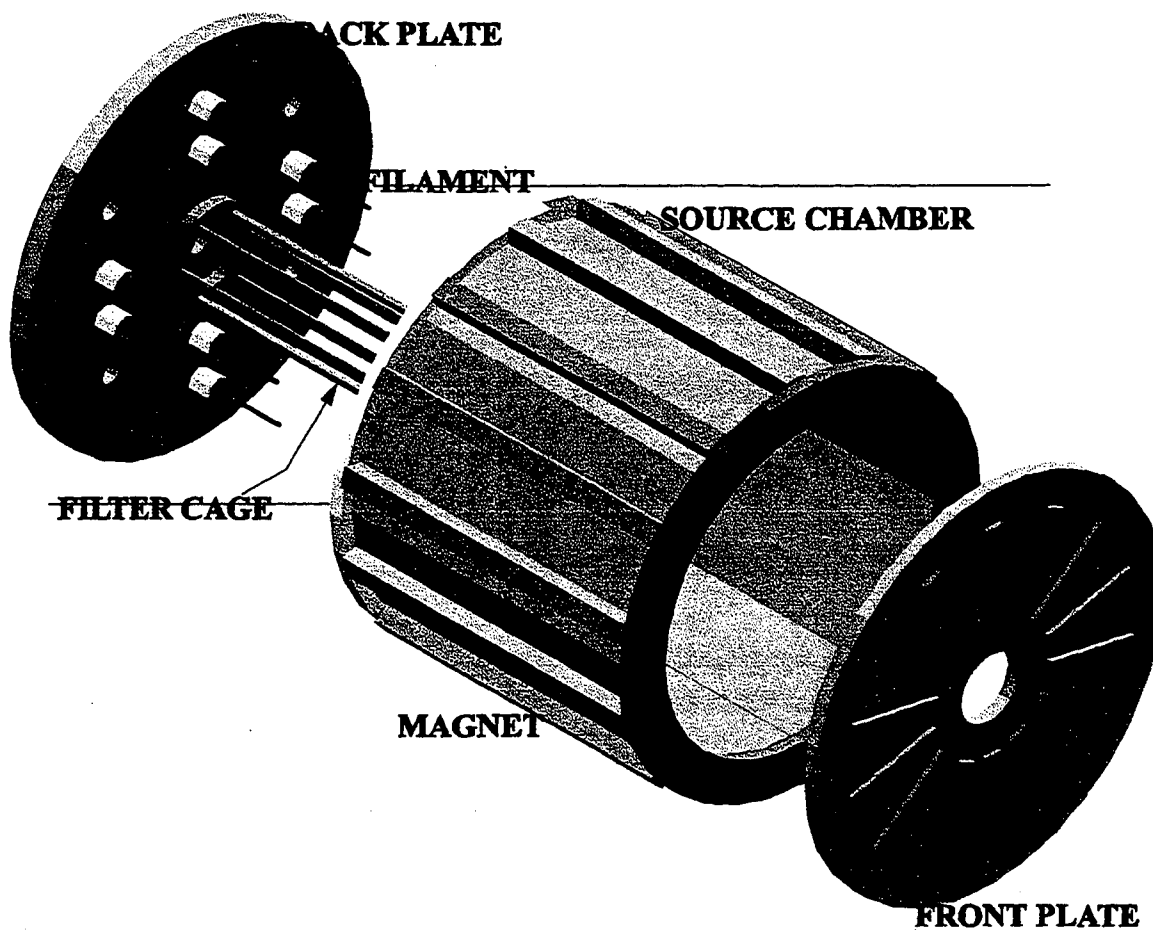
Three dimensional drawing of the co-axial source.
